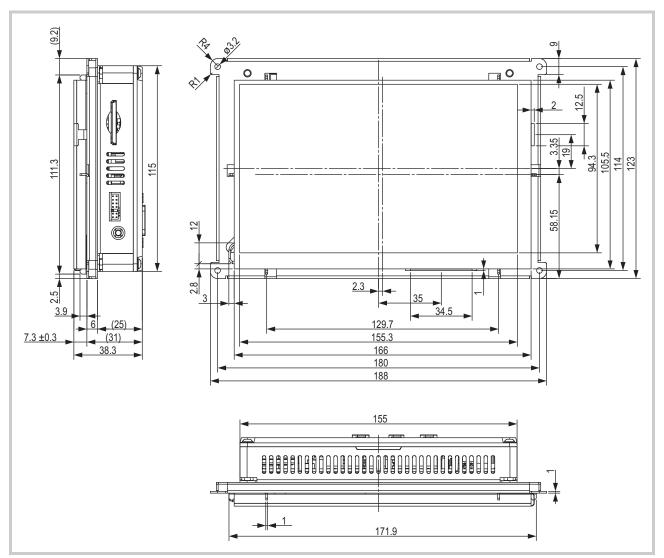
Mechanical dimensions of the 7.0" devices in mm
